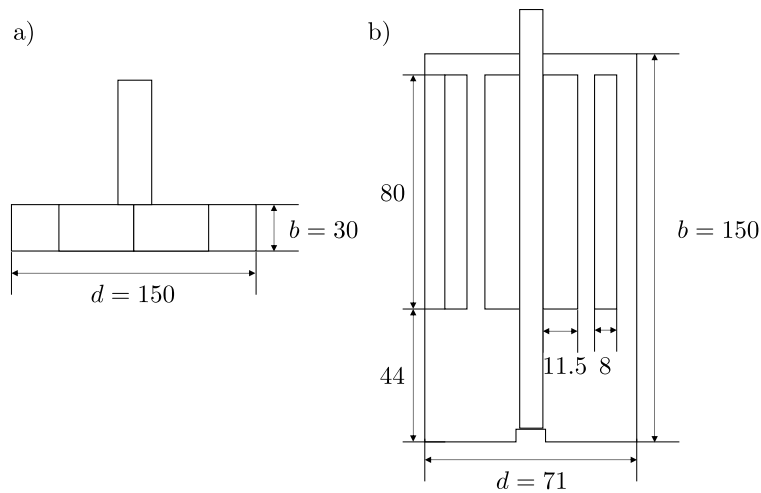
Impellers: (a) paddle, and (b) MAXBLEND<sup>®</sup> (dimensions in millimeters).
